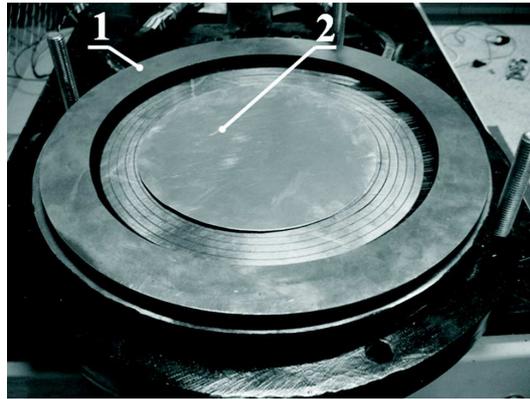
Inductor head: 1– spacing ring, 2 – sheet metal subject to forming.
